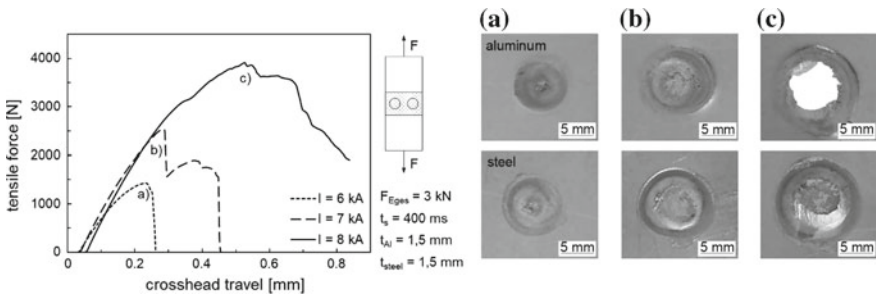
Measured load–strain curves of the joints and the typical resulting fracture behavior: a shear fracture, b mixed fracture, and c fracture of the aluminum base material
